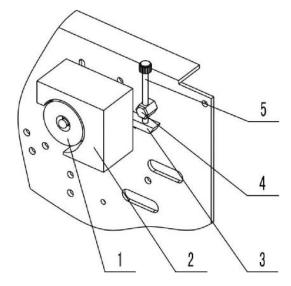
(1) Ink Roller, (2) Ink Roller Heating Block, (3) Swing Pole, (4) Adjusting Strut, (5) Ink Wheel Adjusting Device
